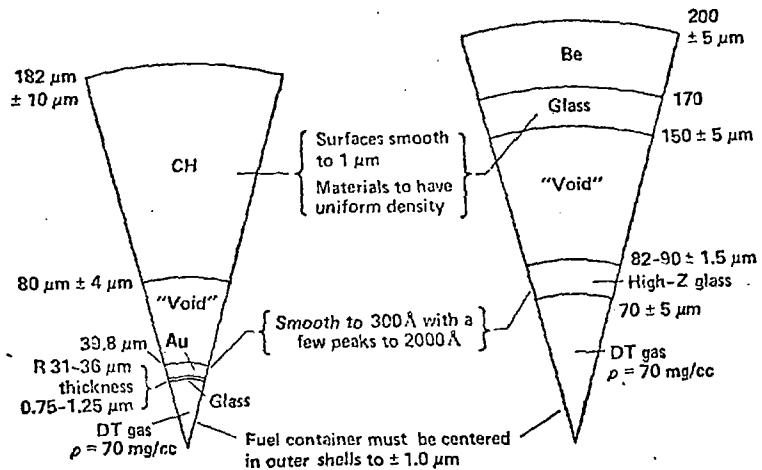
Detailed pellet design specifications. The "pie"-shaped sections are taken from typical pellet designs and include dimensions and tolerances.
